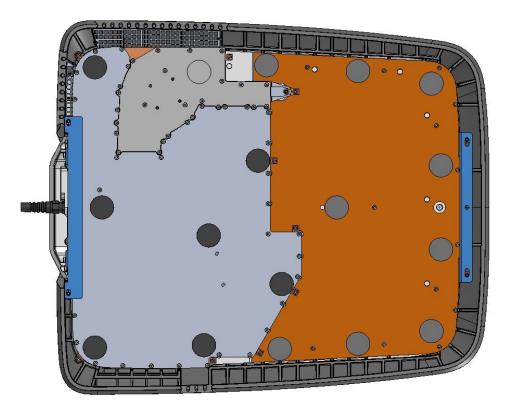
Bottom of the GPM with mounting rails (blue). The right-hand rail snaps into recesses of the GPM-housing. The left-hand rail (on the cable bushing) is screwed tight at the side of the service cover.
